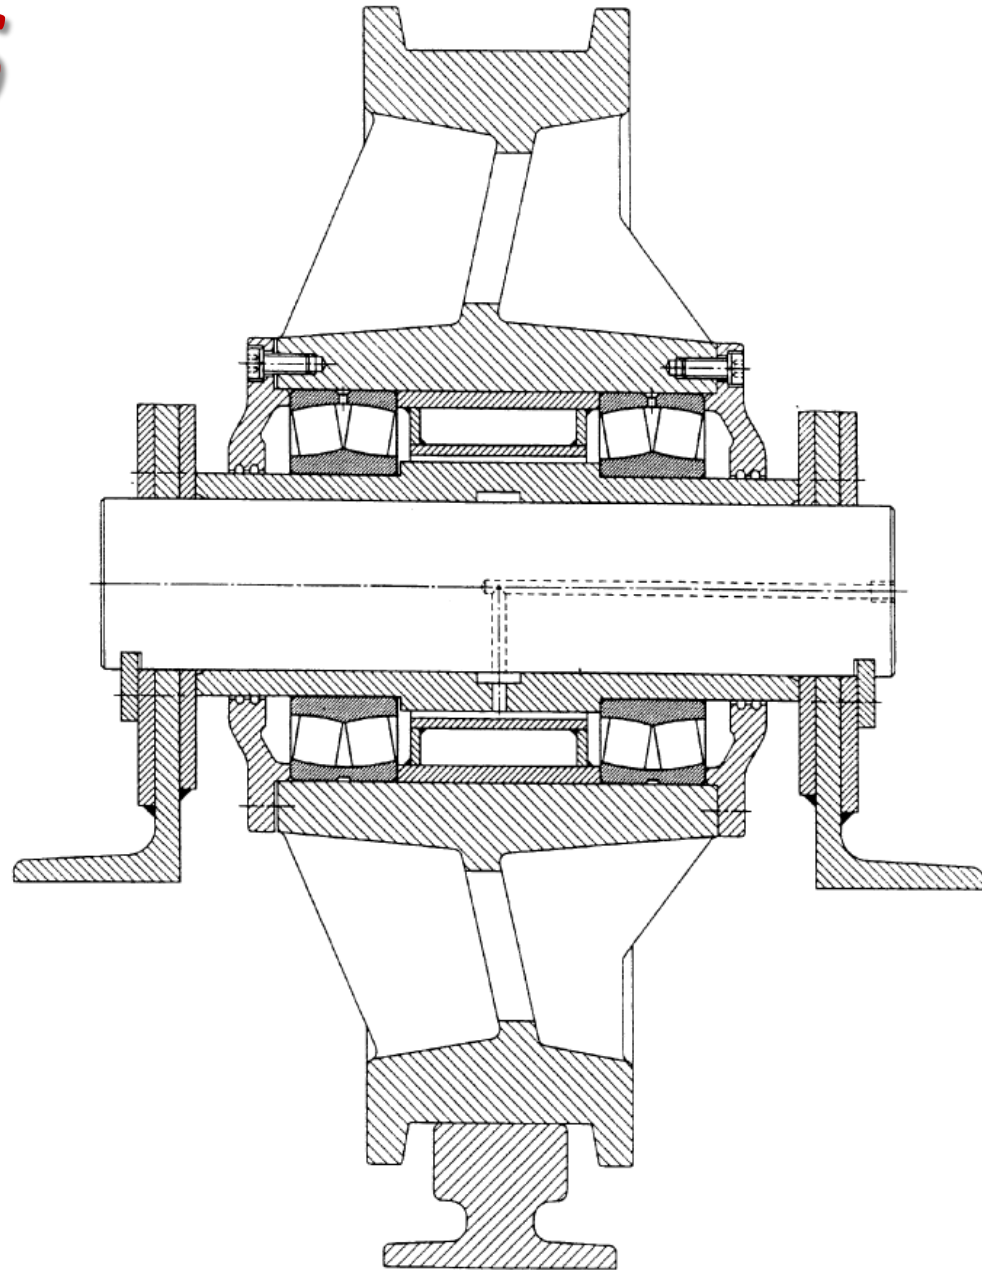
Grease lubrication of crane wheel bearings (from FA
